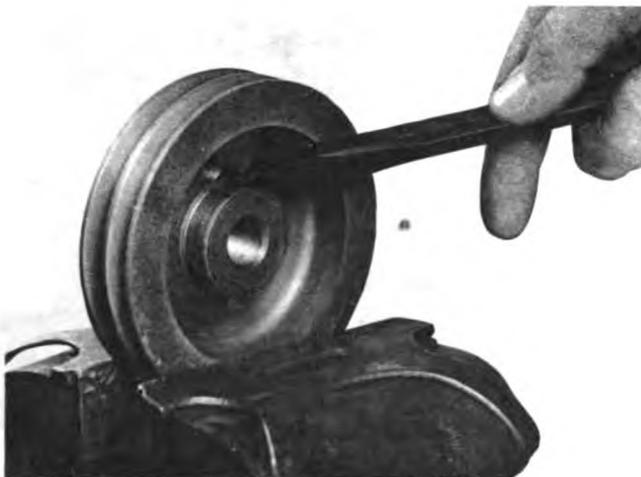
(N10883). Remove The Wear Sleeve From The Pulley.
